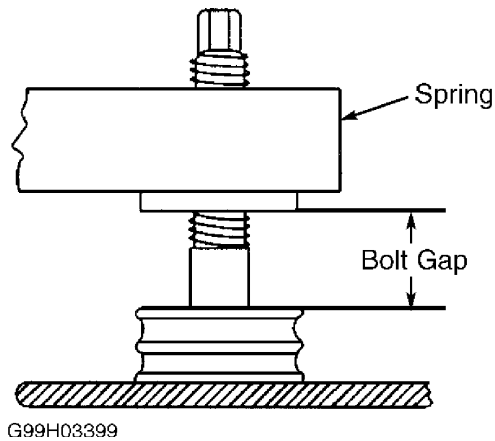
Measuring Front Spring Adjuster Bolt Gap ("Y" Body)
